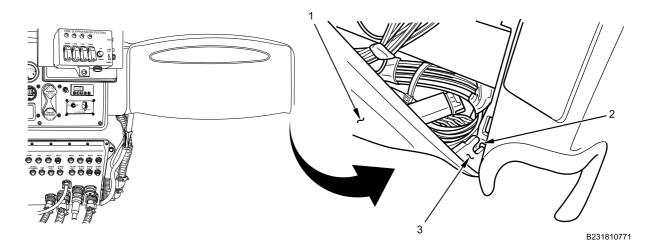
IP Right Side Closeout Fuse Panel Engagement.
